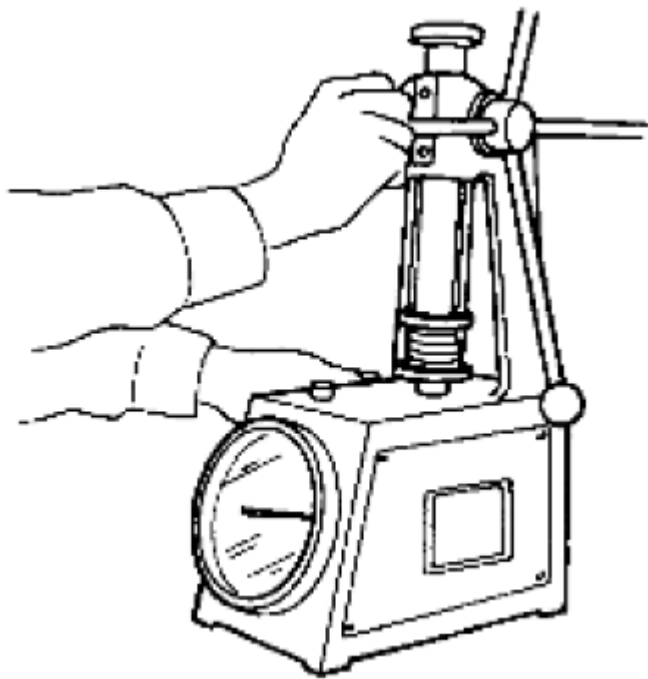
Checking Valve Spring Pressure At Specified Spring Height
